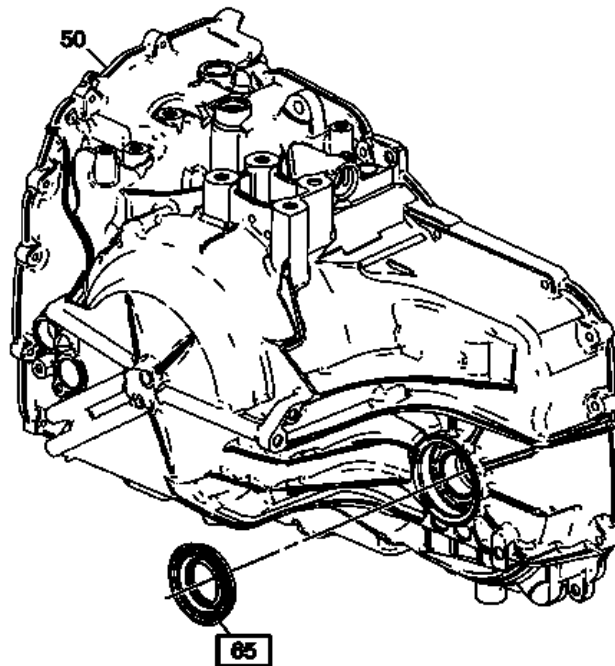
Front Wheel Seal Kit (Gen 1 And 2) 19258416
